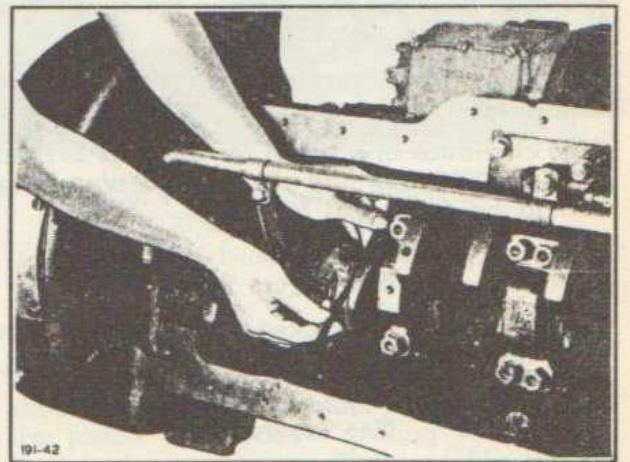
Checking Connecting Rod Side Clearance with Feeler Gage
